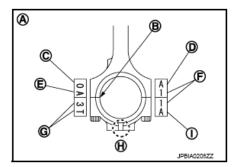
Identifying Stamped Cylinder Number Marks On Connecting Rod Courtesy of NISSAN MOTOR CO., U.S.A.
